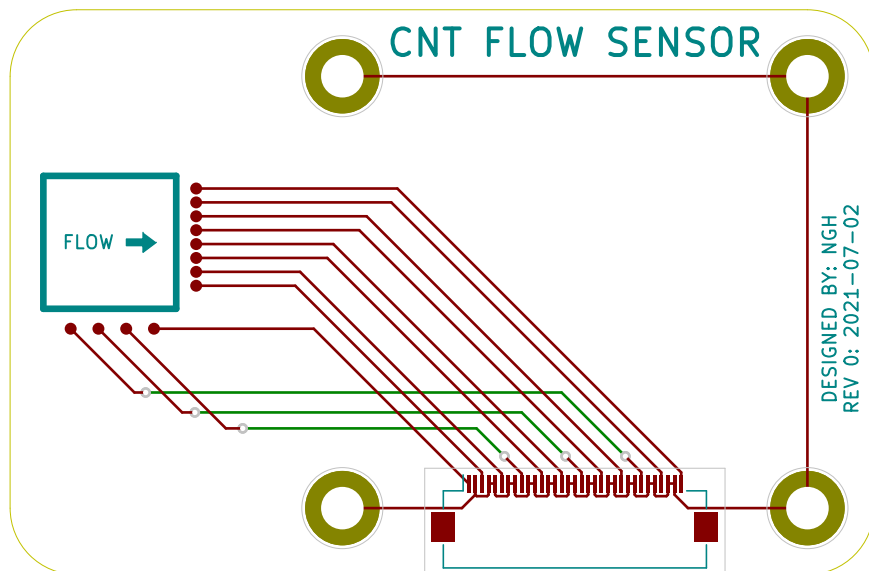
Interface PCB layout. Top copper is shown in red, bottom copper is shown in green.
